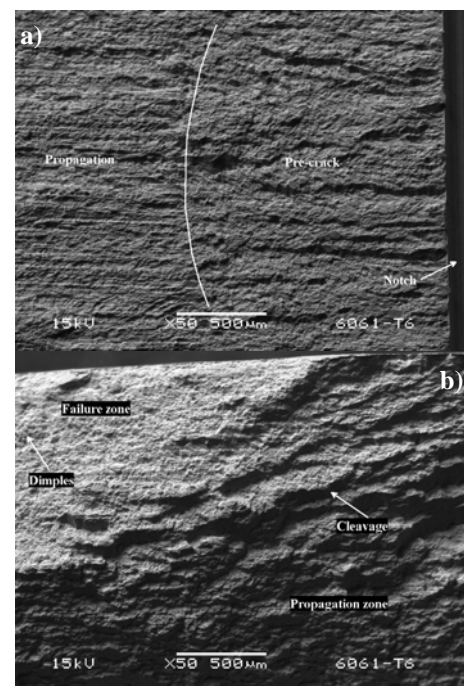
Details of base metal fracture, a) pre-crack and propagation and b) propagation and failure.
